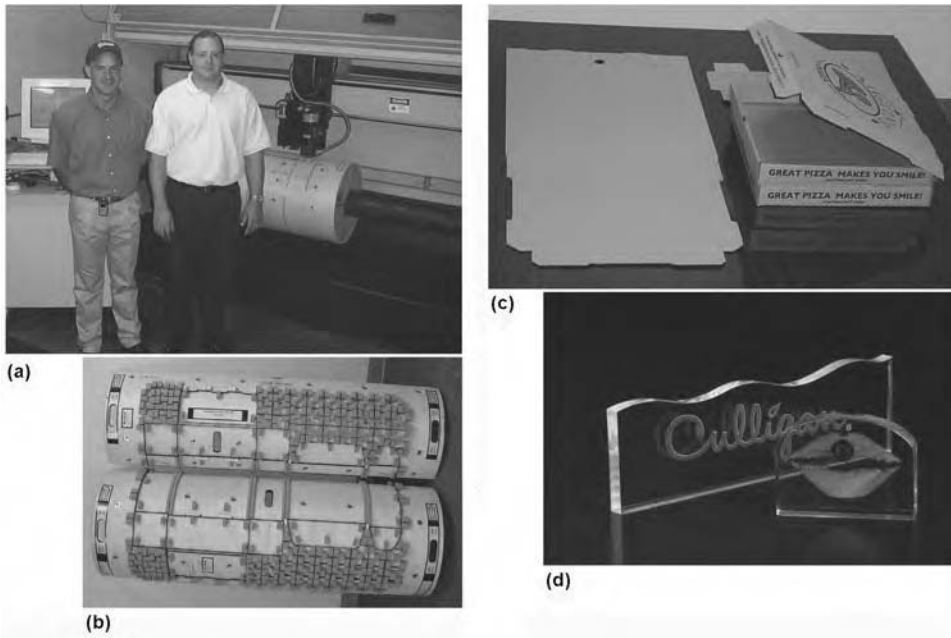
(a) Cylindrical die board being laser-cut. (b) Ready-to-ship die board with steel rule blades inserted, and gray rubber pads with pressure-sensitive adhesives to prevent cardboard from sticking to the die after the cut. (c) Examples of corrugated boxes for pizza delivery cut with die board steel rule dies. (d) Acrylic plastic sheets can also be cut with lasers.
